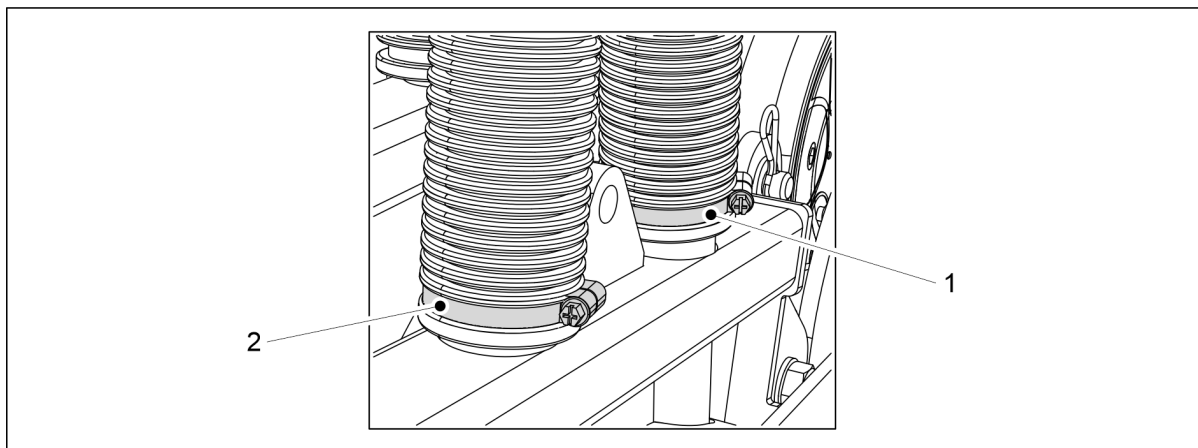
58. Attaching the seed and fertiliser tube to the coulter
